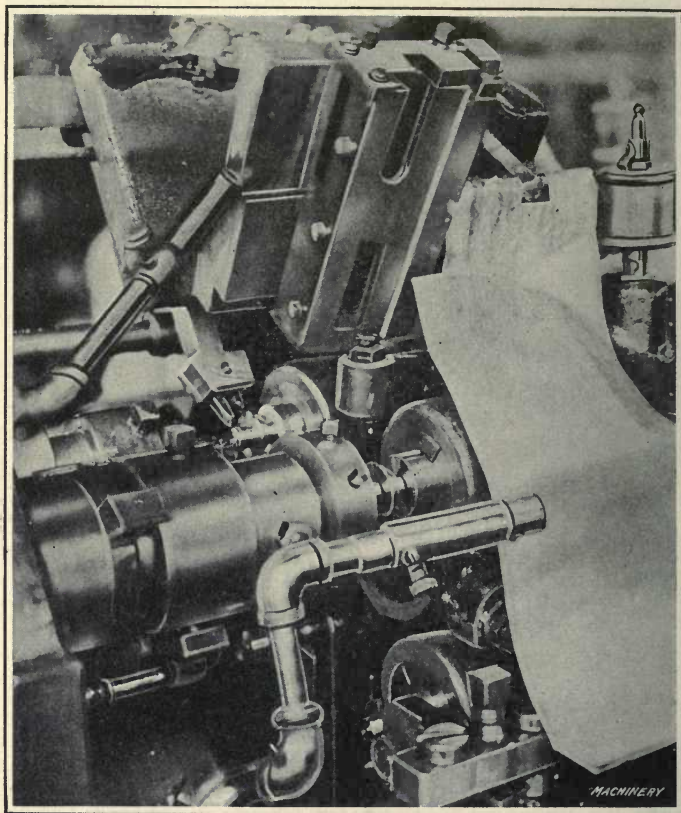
Set-up on No. 55 Acme Multiple-spindle Automatic Screw Machine for machining Fuse Cap
